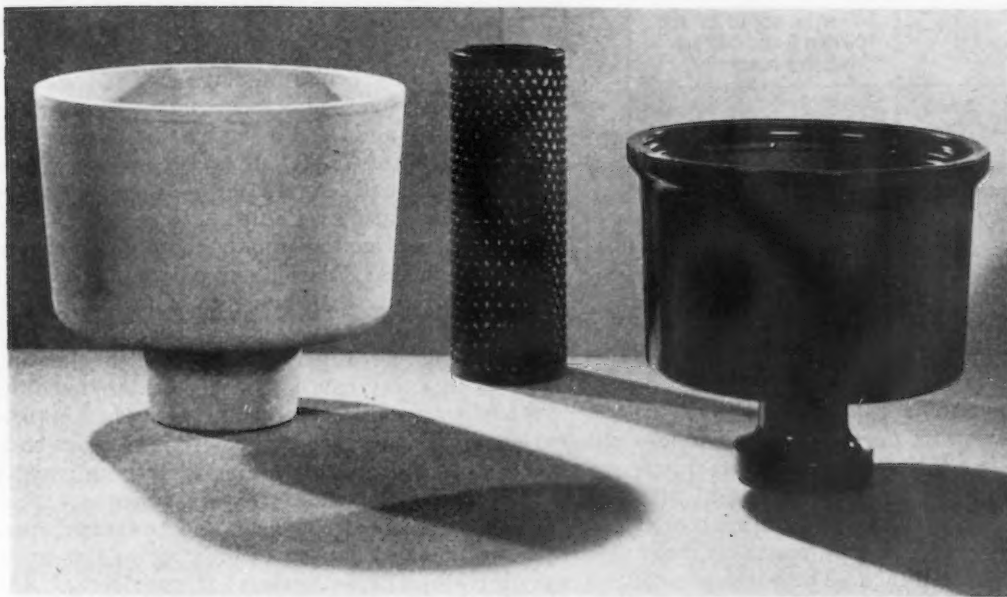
Forged aluminum spinning buckets used in rayon industry are made corrosion resistant by a heavy coating of phenolic resin solution (bucket on right). The spinning spool (center) is similarly coated.
